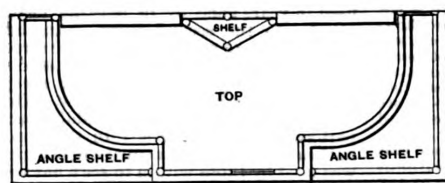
Plan View.—Scale, 1 Inch to the Foot.
